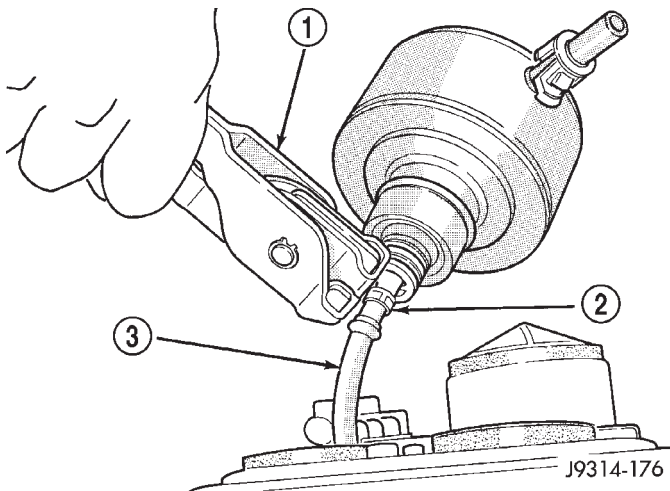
Tightening Fuel Tube Clamp—TYPICAL
